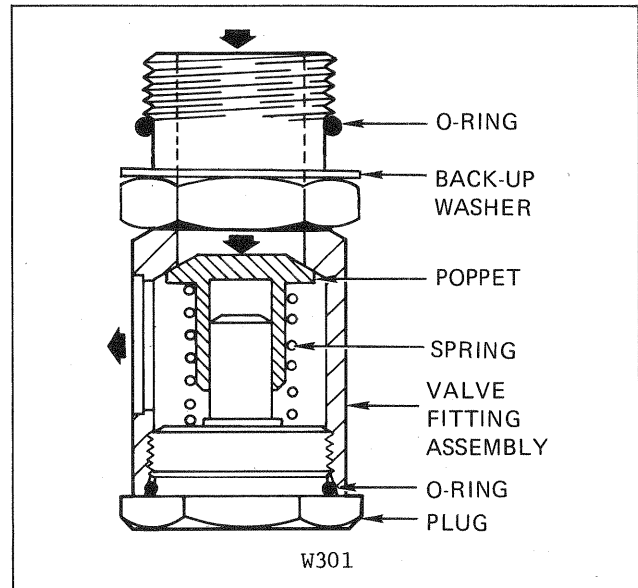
COOLING OIL RELIEF VALVE ASSEMBLY, POWER CONTROLLED WINCH
